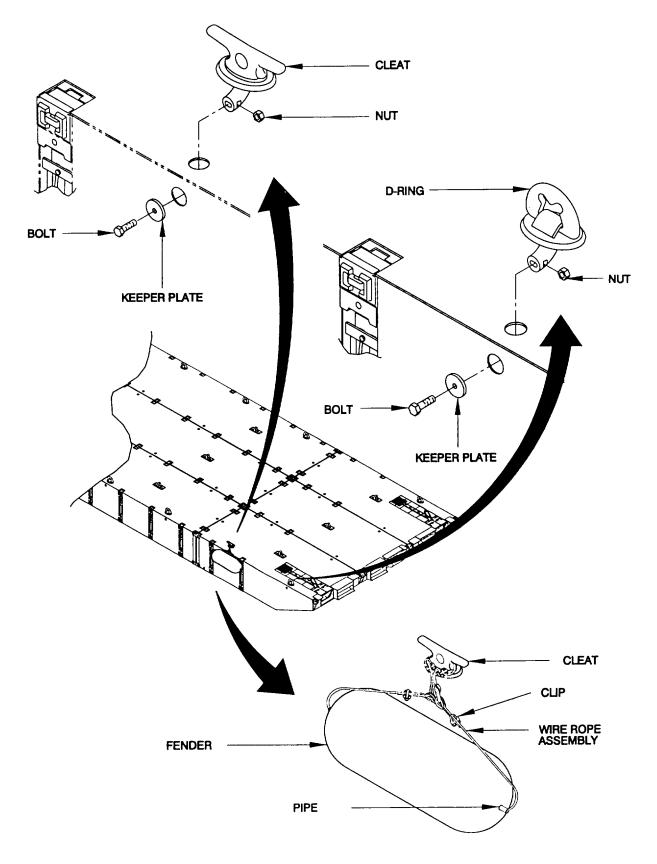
Deck Fittings, Fenders, and Rhino Horn Installation (Sheet 1 of 2).
